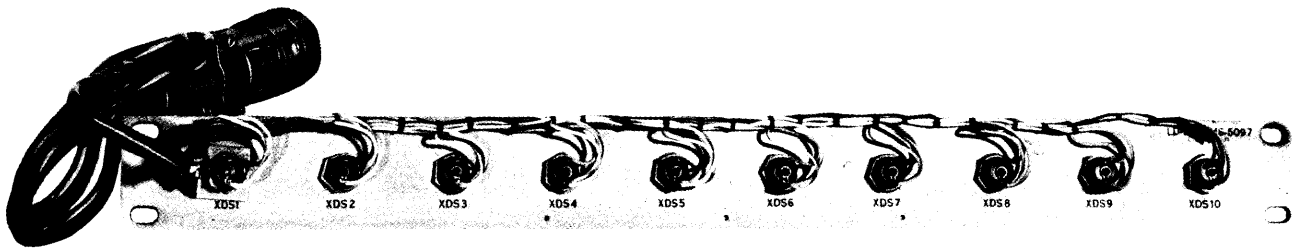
Component Locations, Rear View of Indicator Panel, SB-3230/UR
